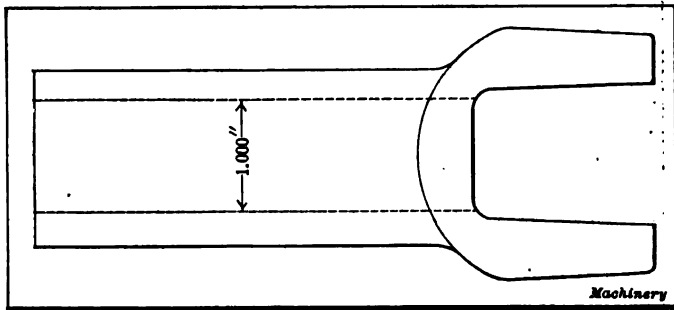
Slip-hub in which the Round Hole is finished by broaching.
